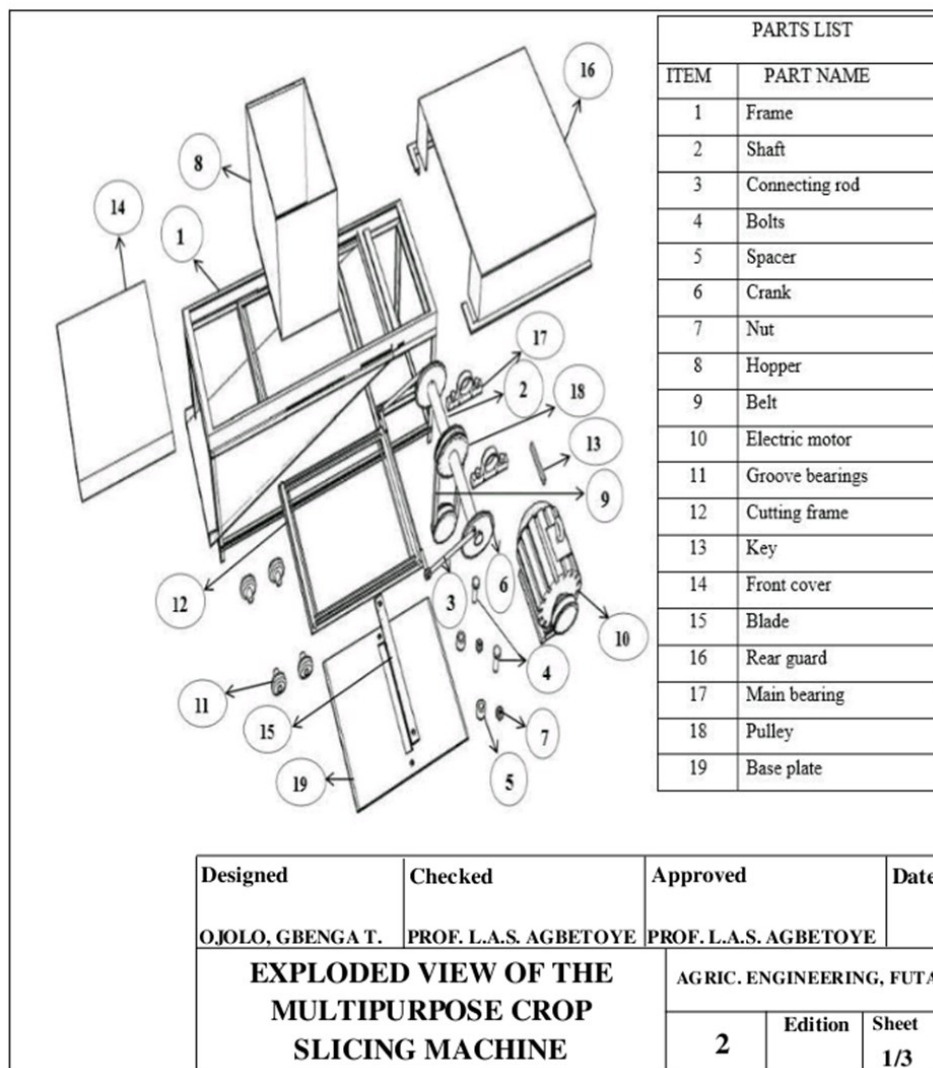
Exploded view of the multipurpose crop slicing machine
